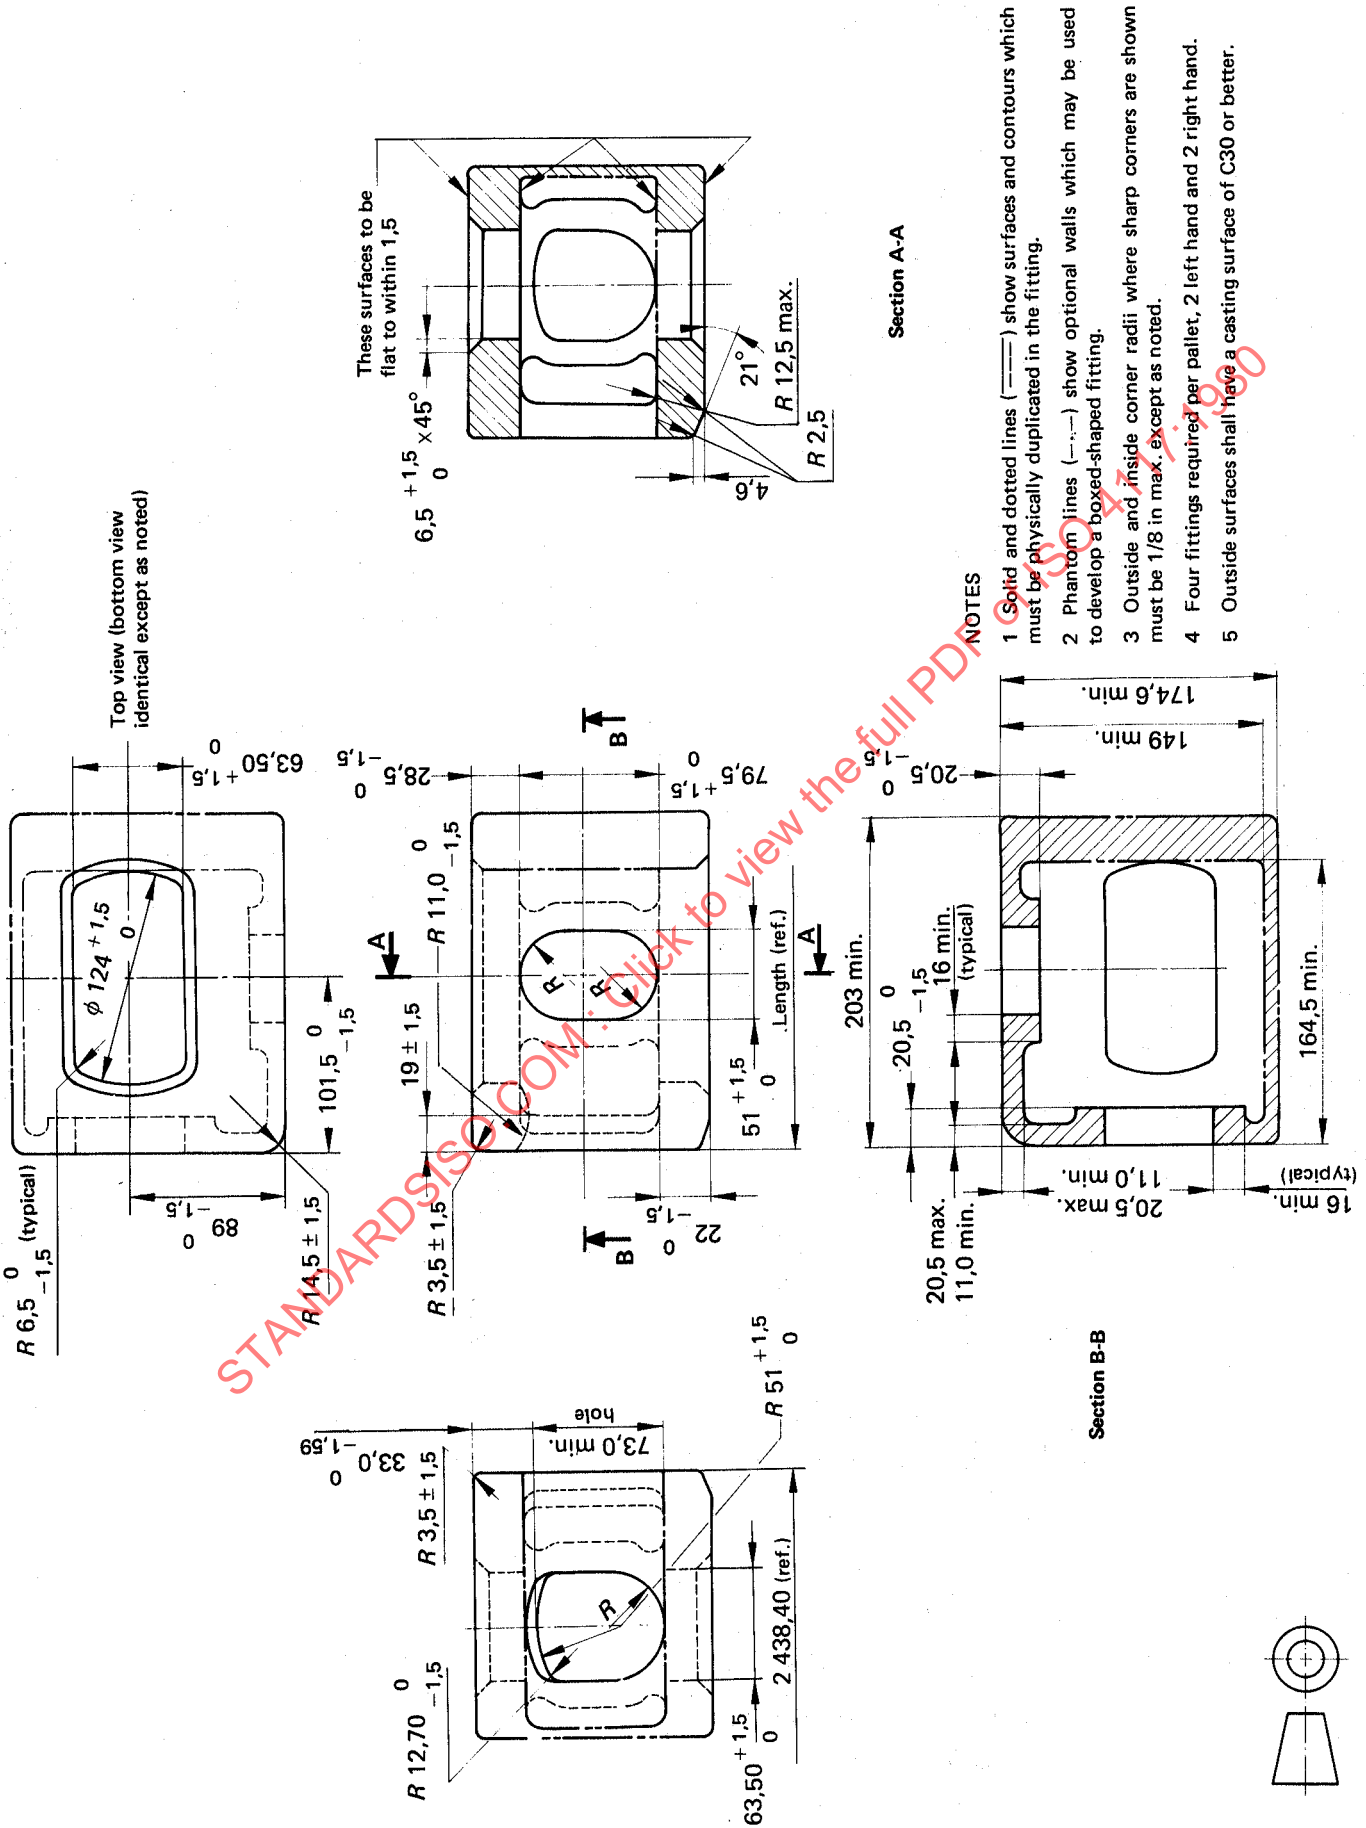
Recessed corner fitting — Dimensions in millimetres (see figure 8)
